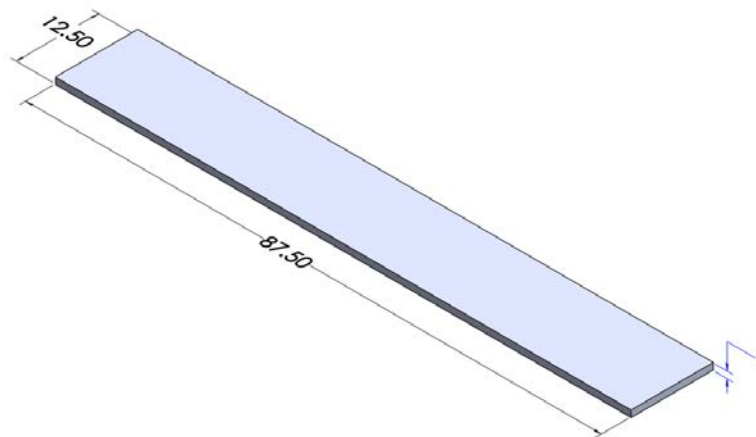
Anisotropy test specimen with dimensions (Units in mm)
